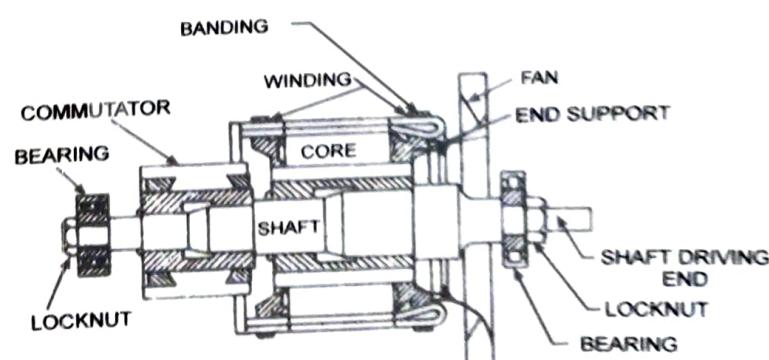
Sectional View of Rotor Assembly of a DC Machine
